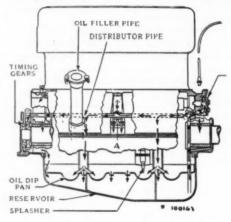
Lubrication system of 1918 Studebaker, 4-cylinder engine
